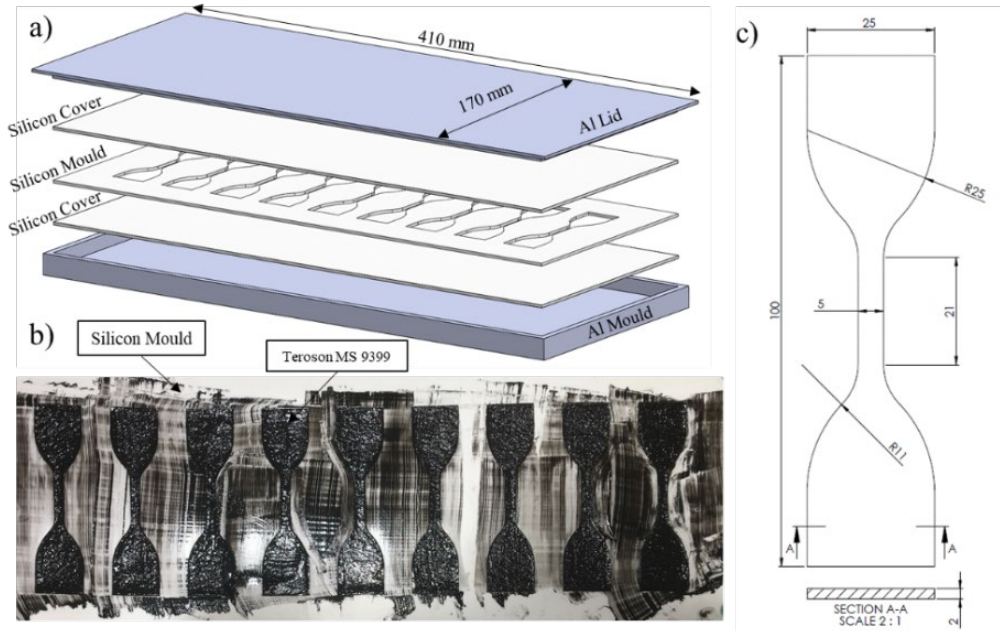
(a-b) Mould for bulk polyurethane adhesive tensile specimens (c) Standard bulk adhesive test specimen from EN ISO 37:2011 (Units in mm)
